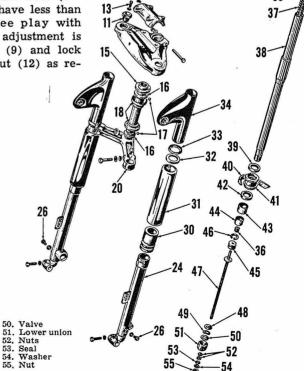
Exploded view of Mo-Ped and Campus 50 front suspension assembly.
